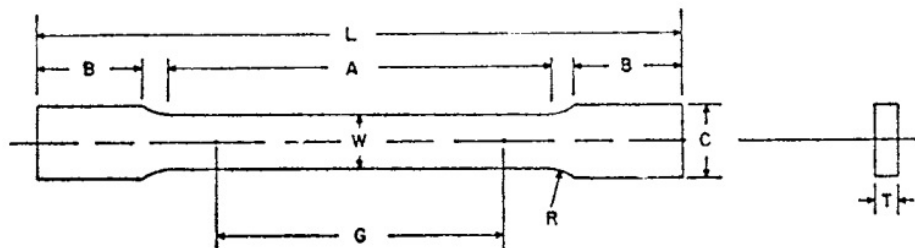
Tensile test specimen geometry ("[ASTM E 8M-04](#)", 2022).
